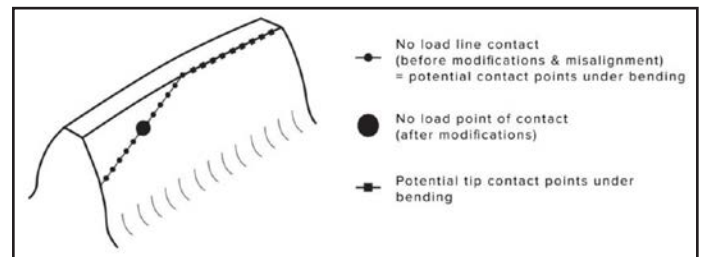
Potential contact line for helical gear tooth with flank modifications and extended contact along gear tip.
